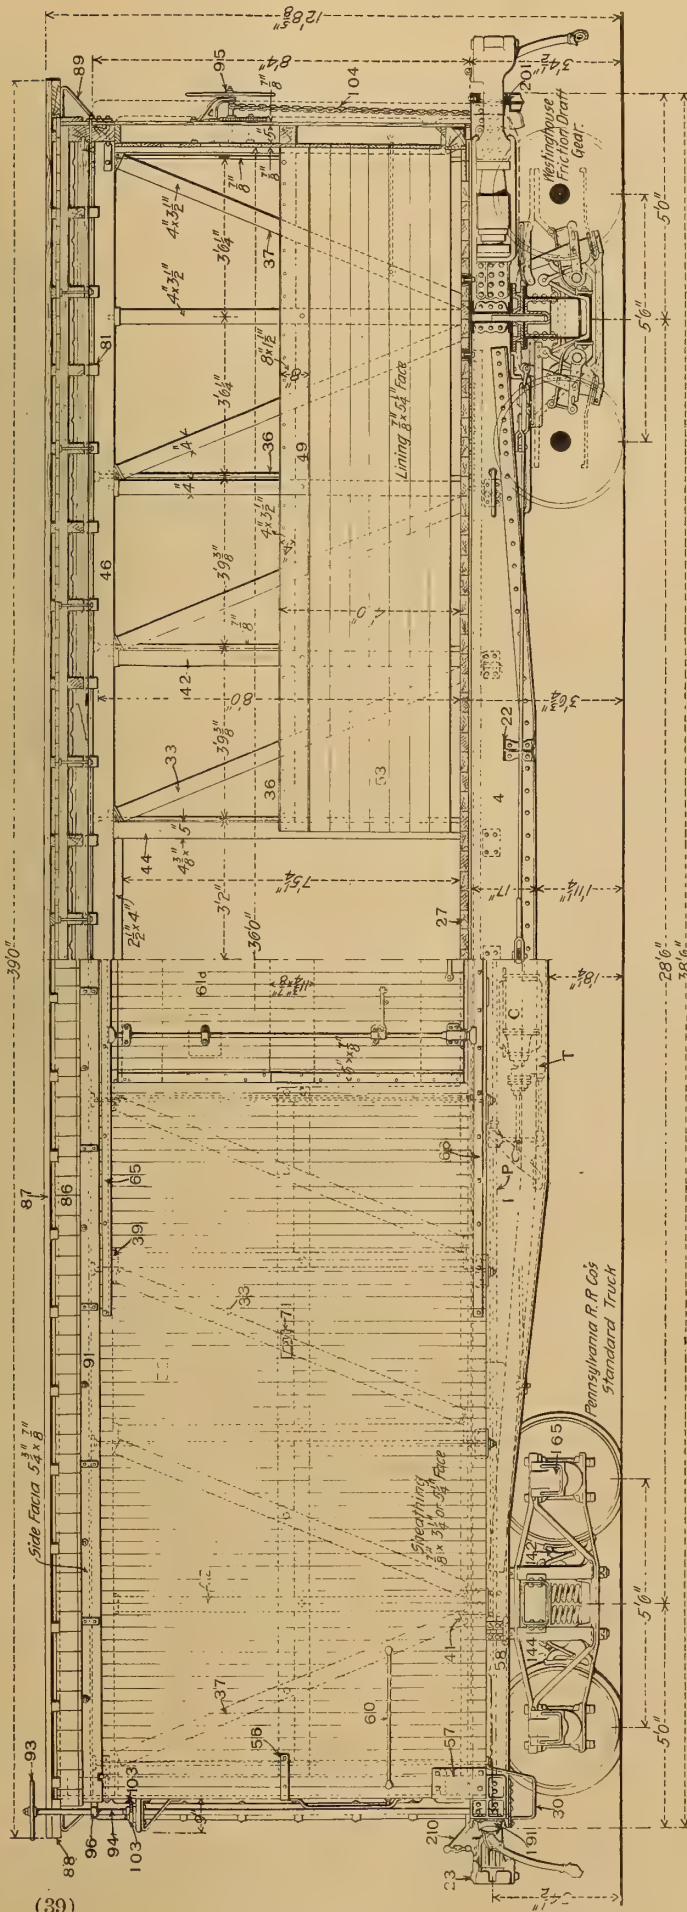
PLAN AND ELEVATION OF 36 FT. BOX CAR. N. Y. C. & H. R. CAPACITY, 80,000 LBS.
